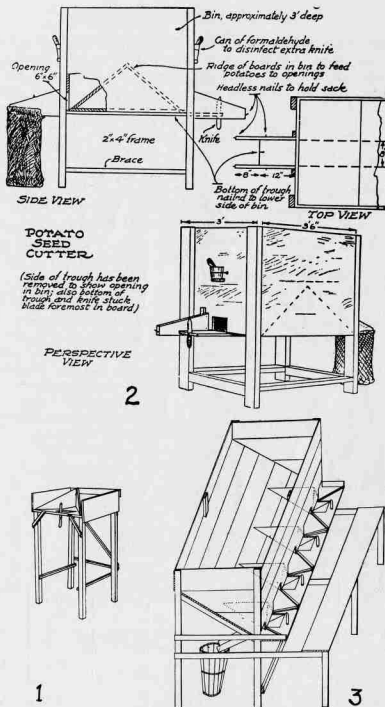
Potato seed cutters. 1. One-place cutter; 2. Two-place cutter (from Colorado Agr. Exp. Sta. Bul. 446); 3. Four-place cutter, about 5½ feet high and 12 feet long. Seed pieces are dropped in chutes and collected in baskets or other containers.
